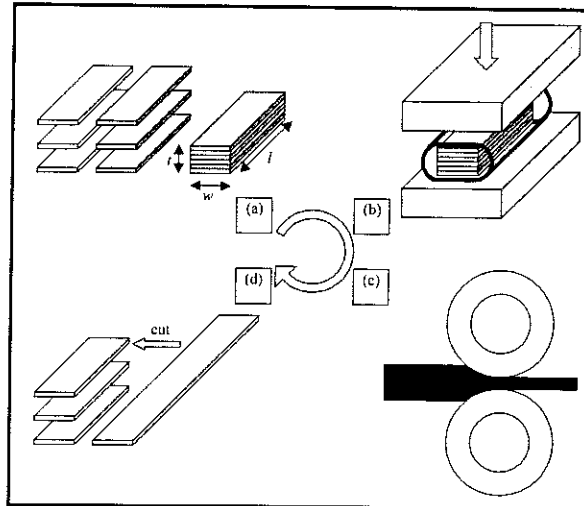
Sheath rolling process: (a) cutting and stacking of starting foils, (b) stack insertion in stainless steel tube followed by compaction in a press, (c) rolling, (d) cutting of deformed stack for re-assembly.
